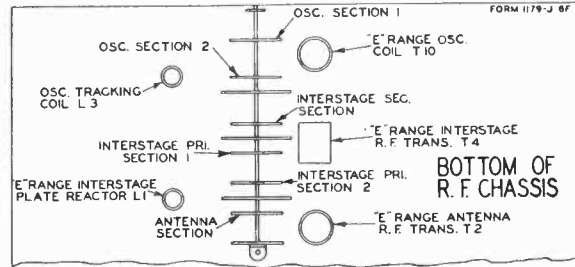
Bottom View of Chassis Showing Coil and Switch Section Location
